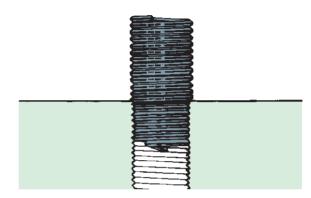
The insert provides new, stock-size threads inside an oversize hole so that the original fastener can be used.
